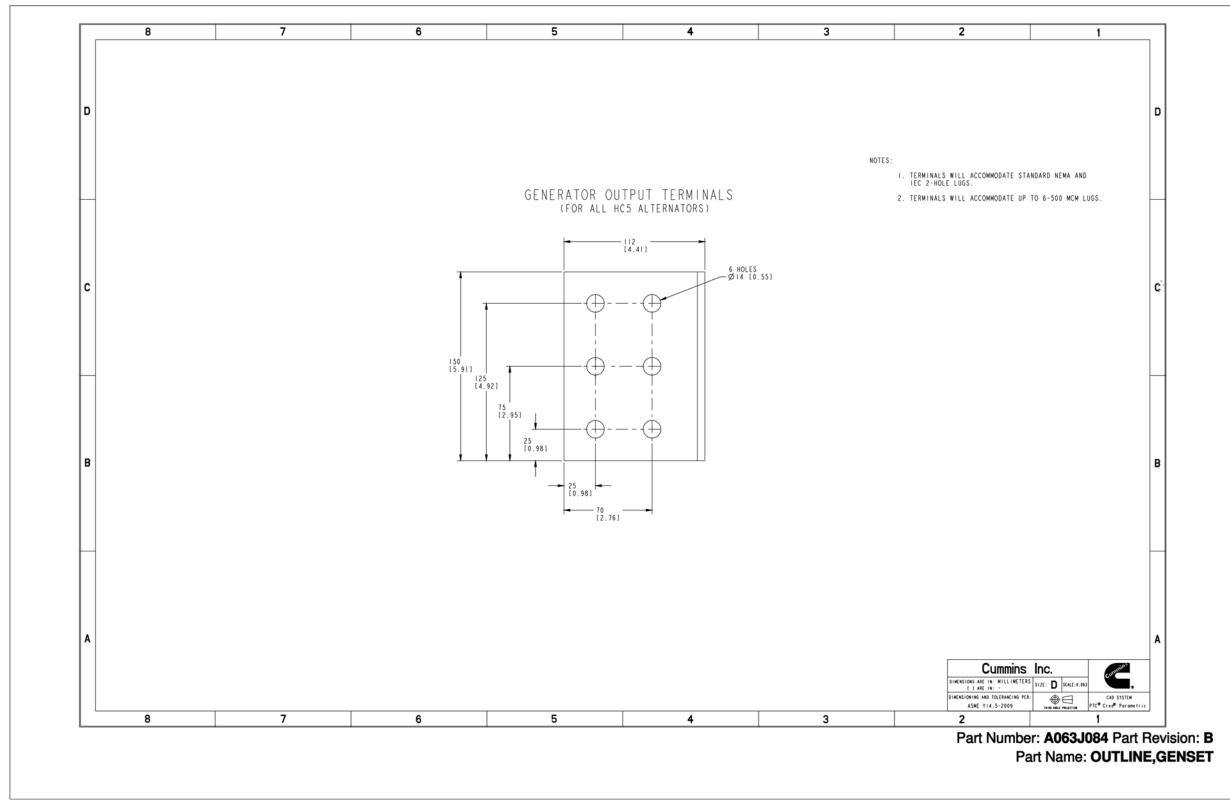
GENERATOR SET OUTLINE DRAWING (SHEET 3 OF 4)
